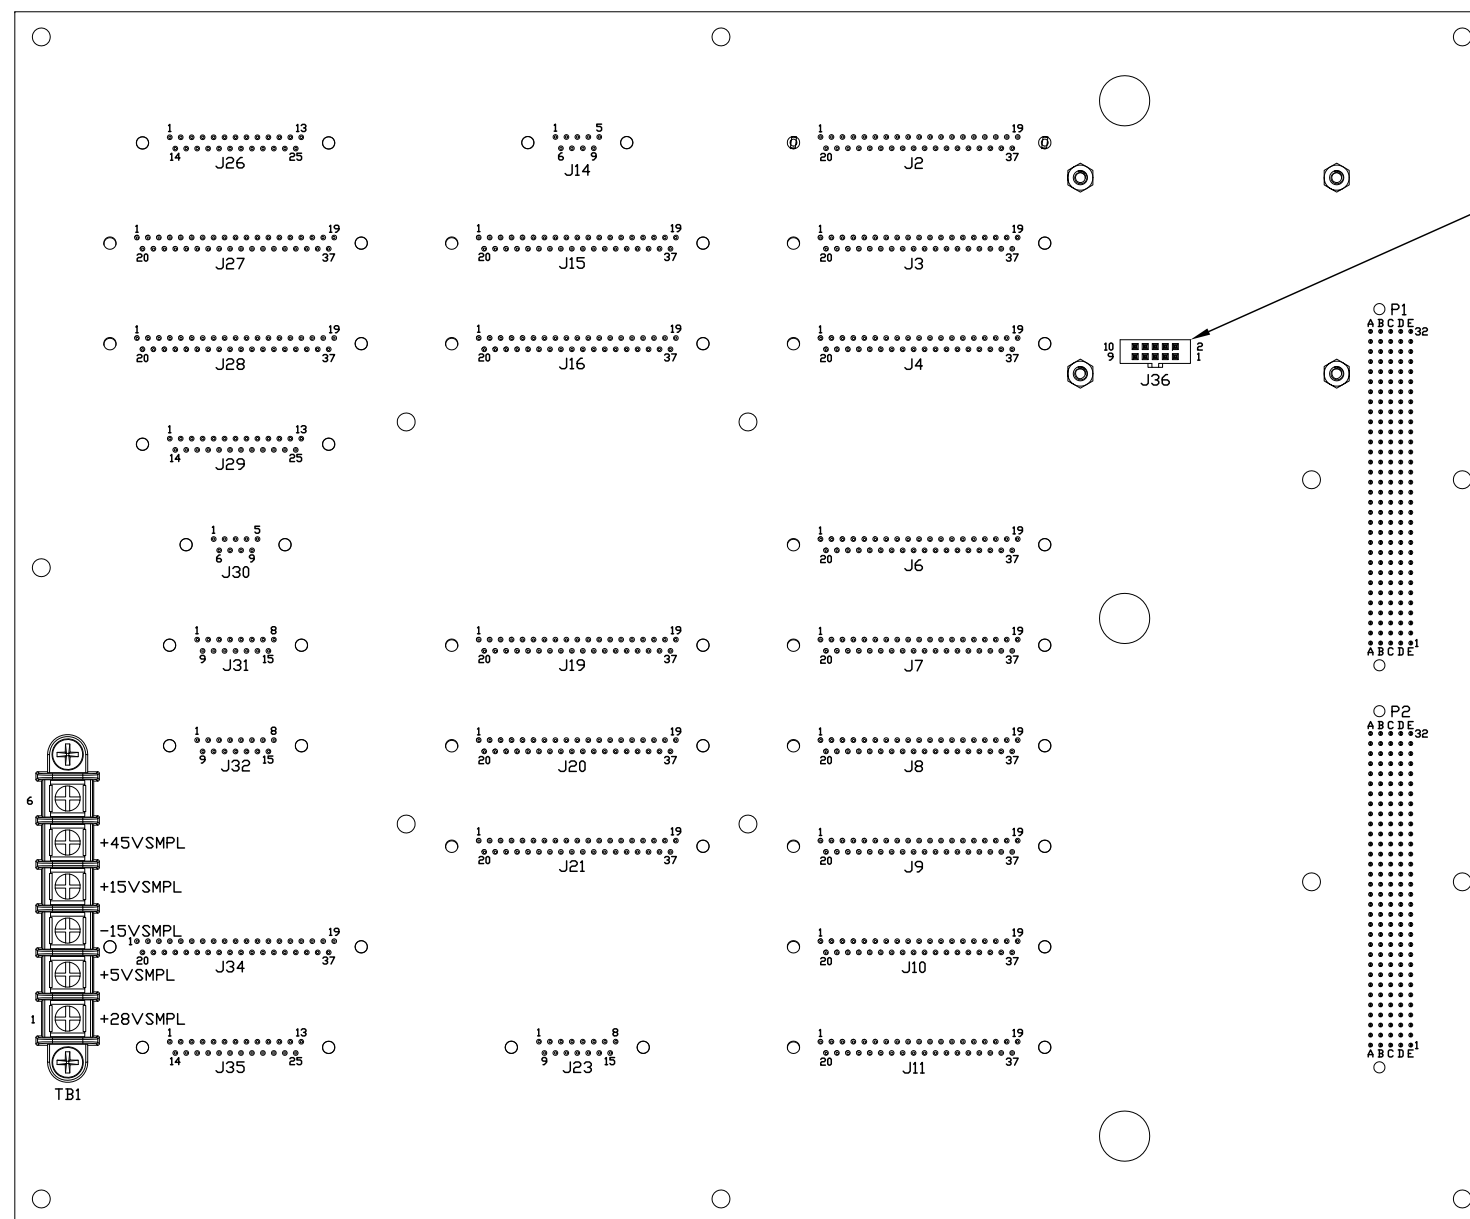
Modulator Pulse Assembly UD3A15 Components Removal/Installation (Sheet 1 of 6)
